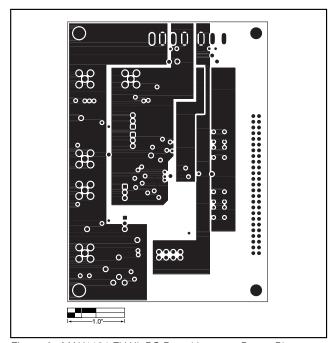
MAX1181 EV Kit PC Board Layout—Power Planes
